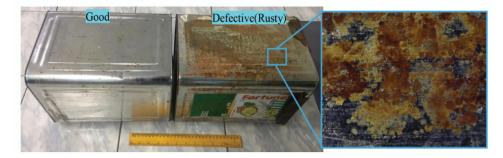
Good sample of tinplate oil cans and defective/corrosive sample of tinplate oil cans.^[24]
